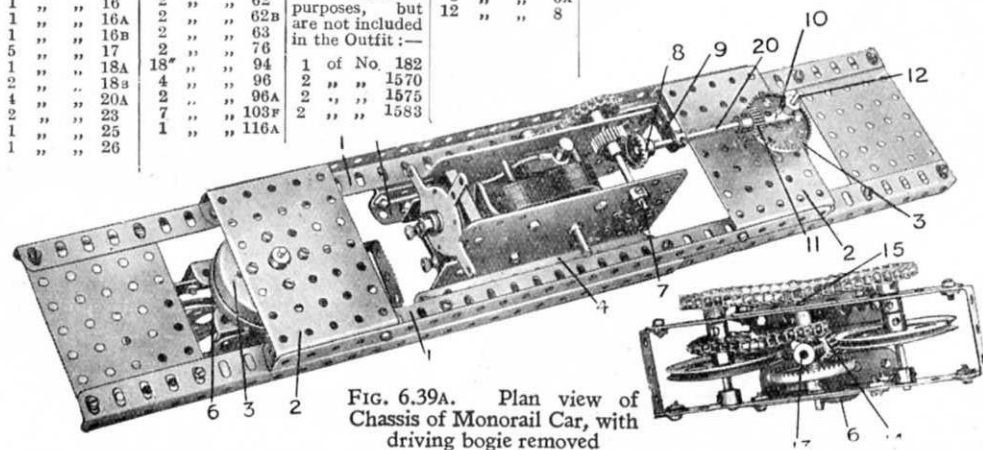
A. Plan view of Chassis of Monorail Car, with driving bogie removed
